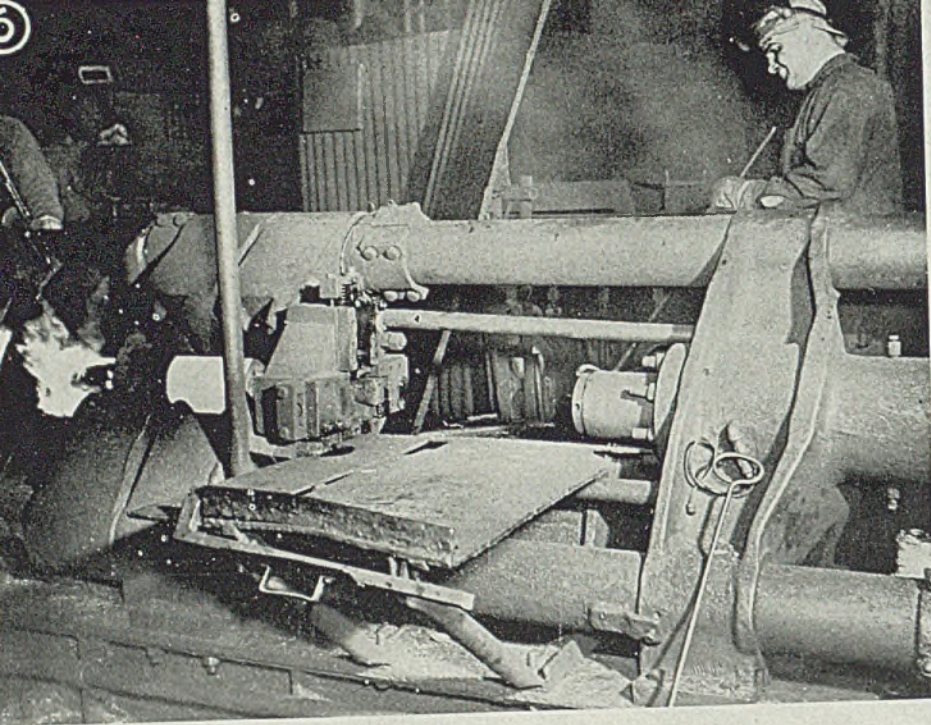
Here forging is being pushed to the right through rings of draw bench after being pierced. When it reaches discharge platform in center, operator will remove and place it in "muff" shown in Fig. 7
